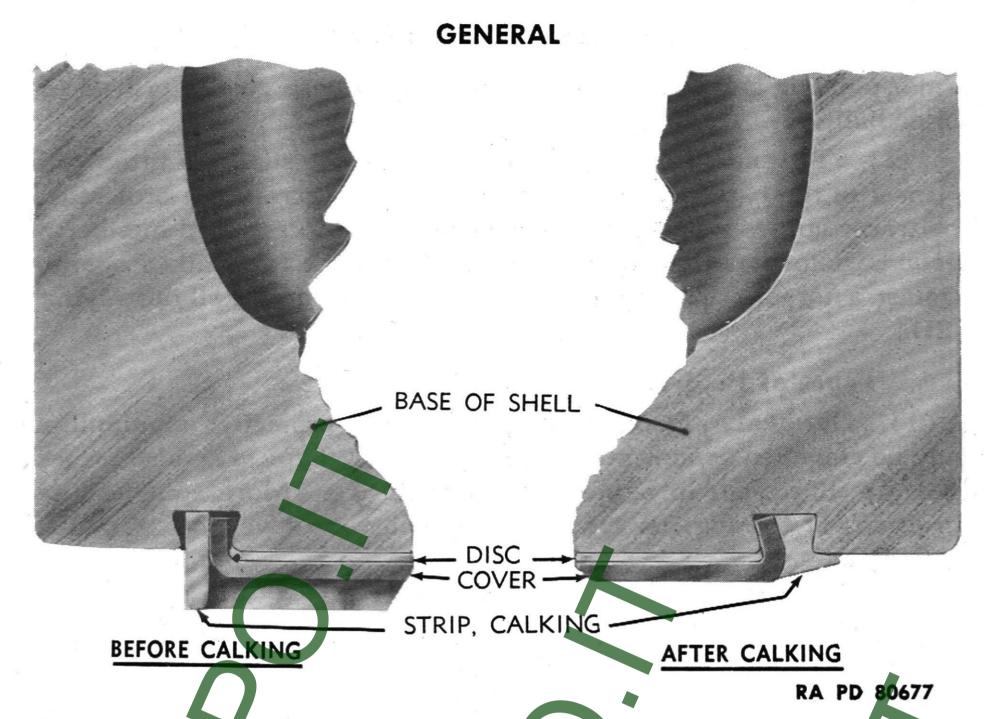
Calked Type of Base Cover for Shell With Explosive Filler
